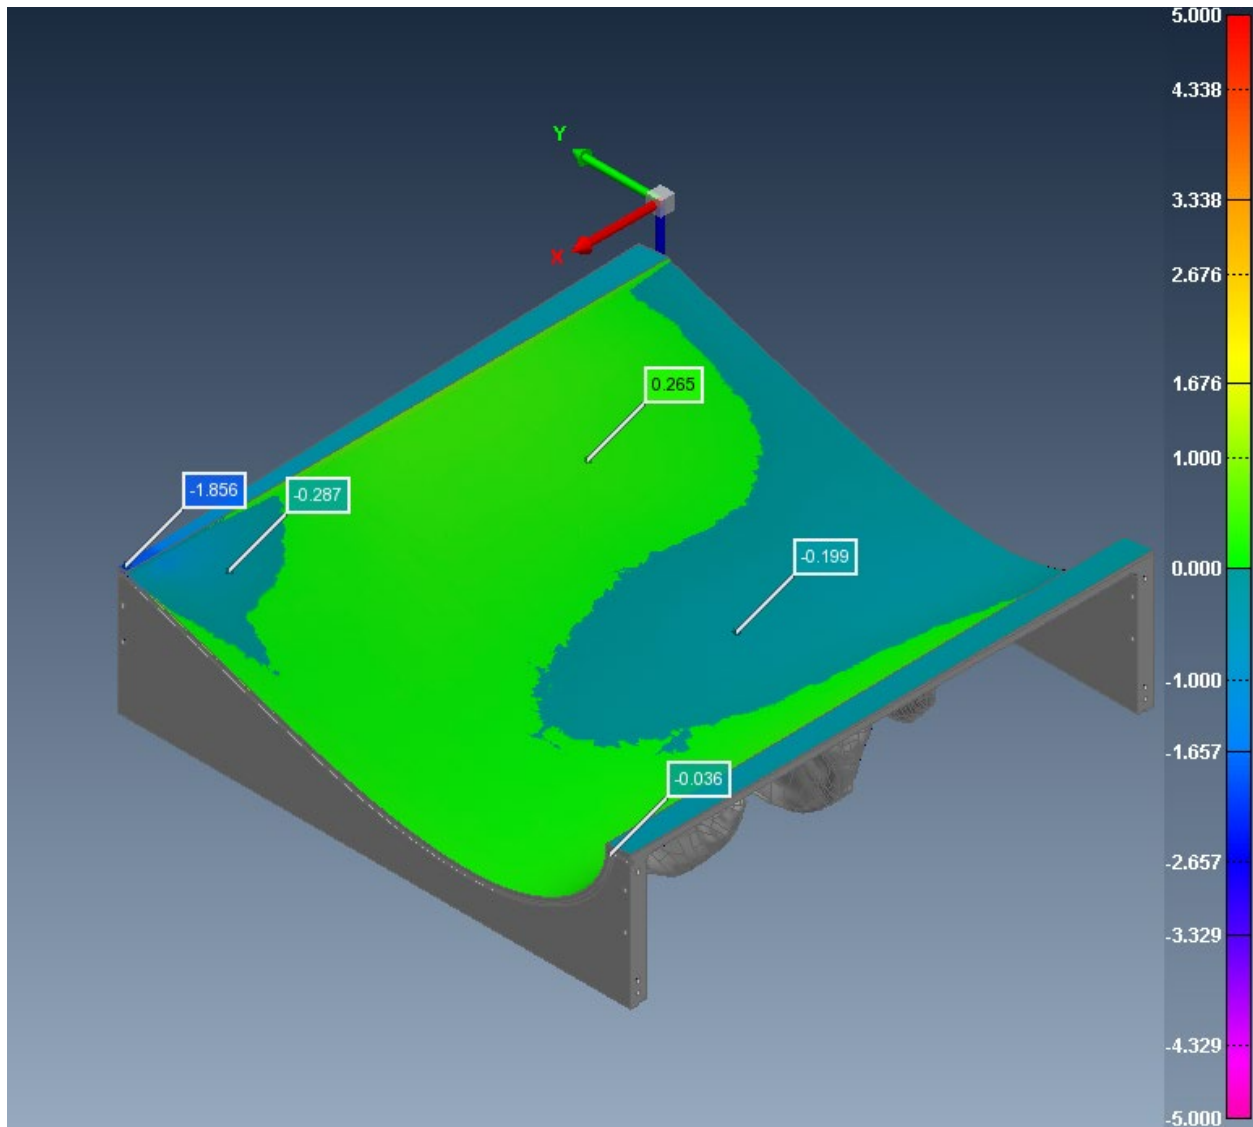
CMM measurement results for the surface side of the printing iteration #4 mold. The color bar entries are in millimeters.
